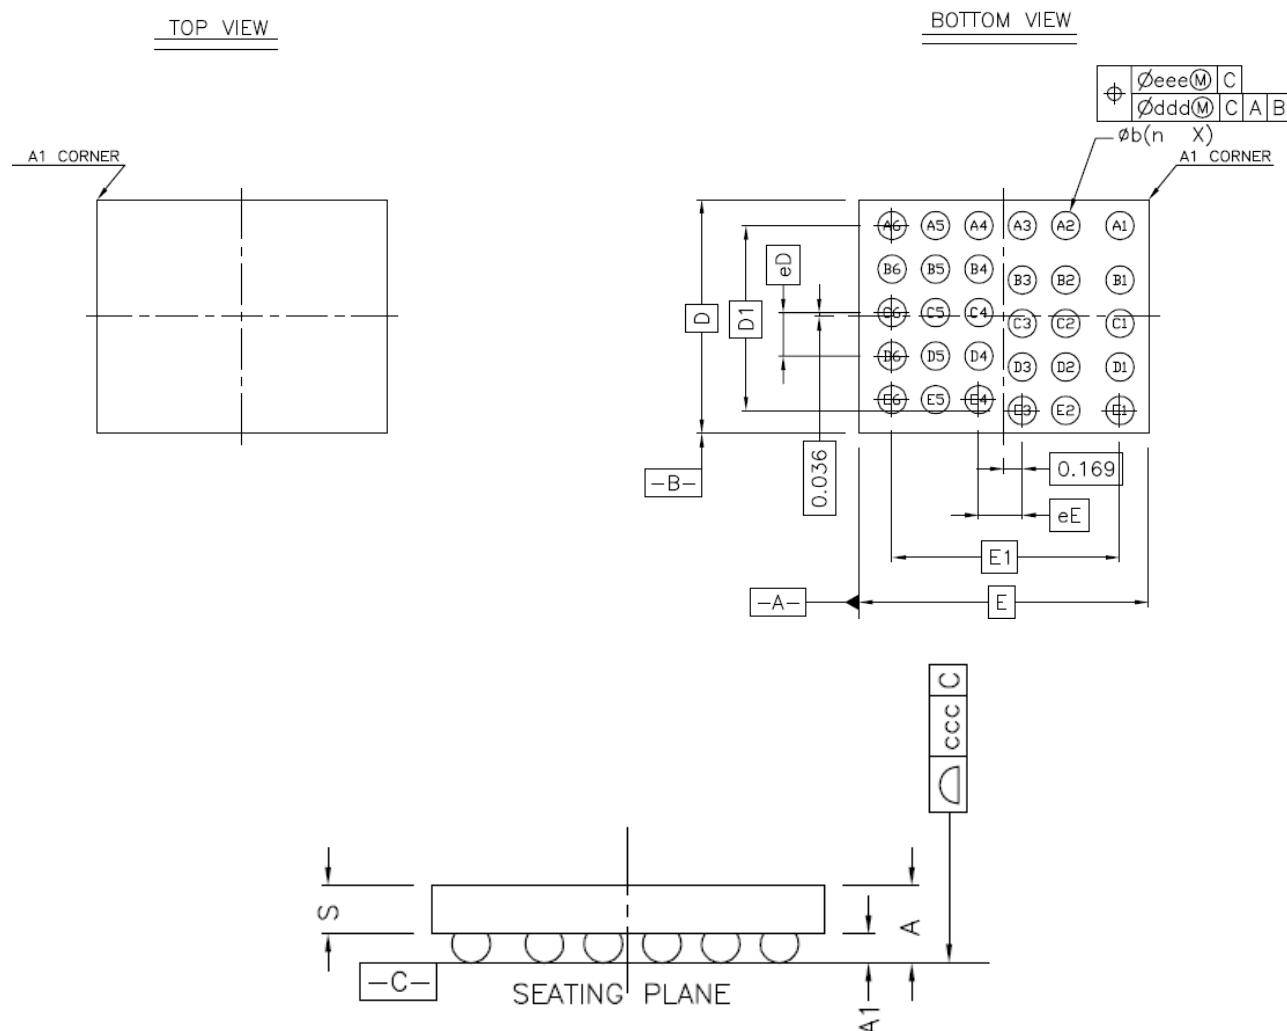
Package outline and dimensions of WLCSP 3.047mm x 2.552mm Package
